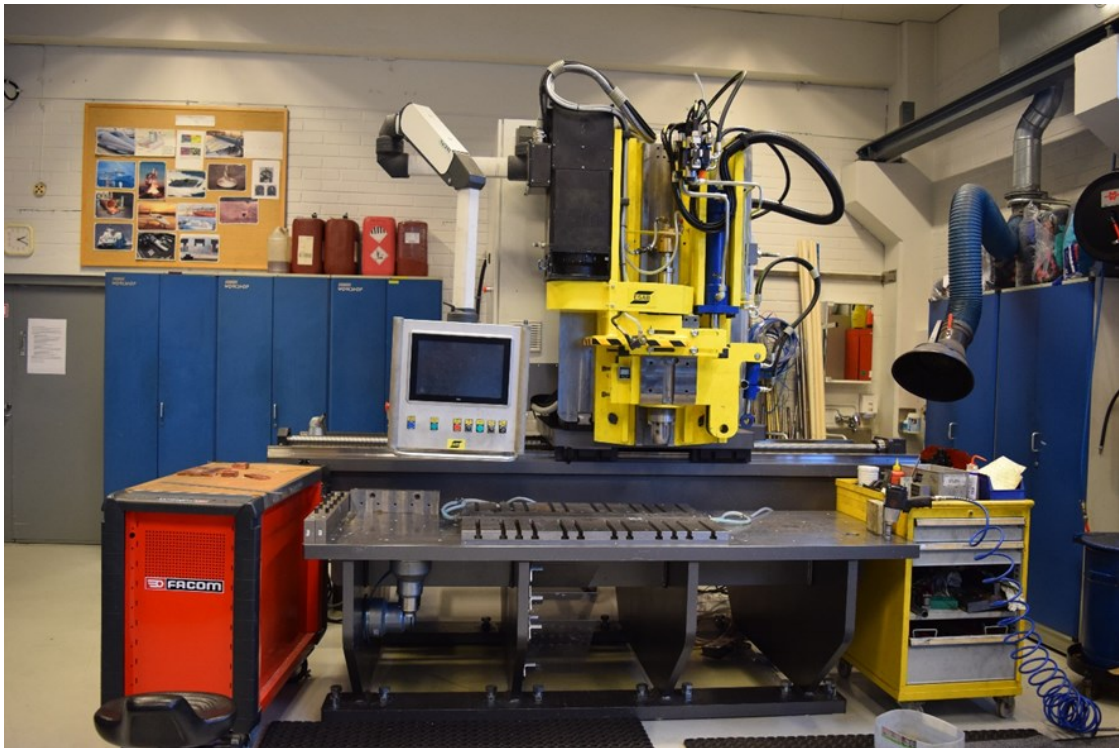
ESAB LEGIO FSW 5UT Friction Stir Welding Machine
